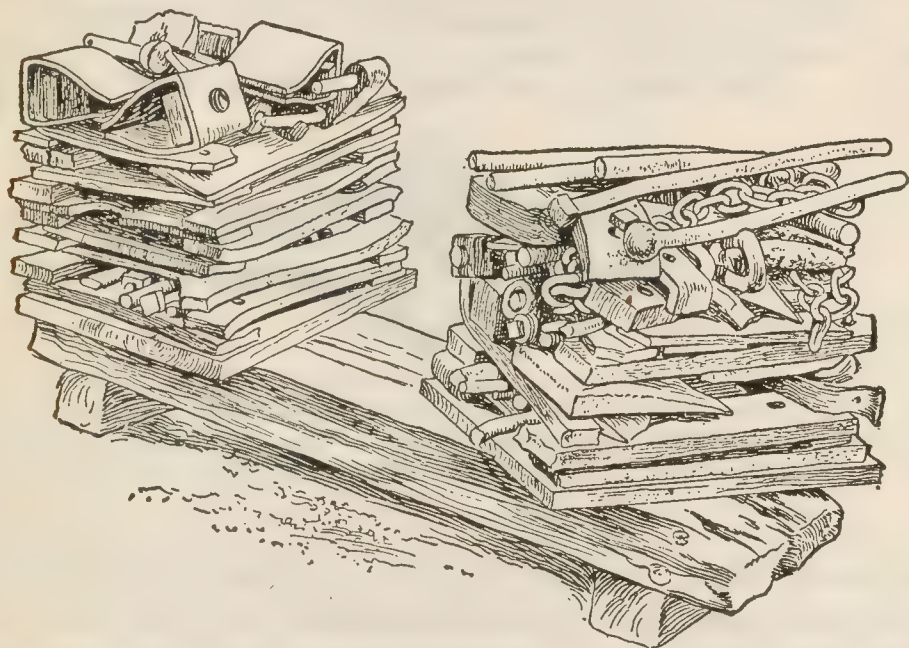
,999.—Fagoting.—The pile is started with a flat piece of iron, generally fagoted up of small pieces and the pieces of scrap iron piled on top of this, making a firm rectangular pile with large pieces around the outside and small pieces in the center, or the flat piece on the board may be omitted. It is then heated in a furnace and welded under a steam or a machine hammer.
